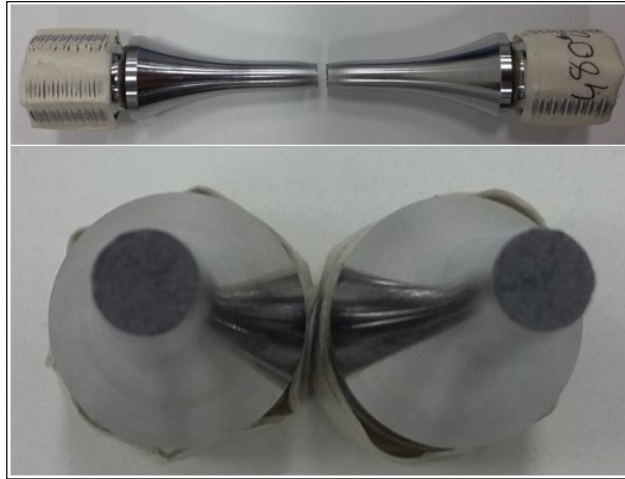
Brittle fracture surface for tensile tested specimen (SP-3)
